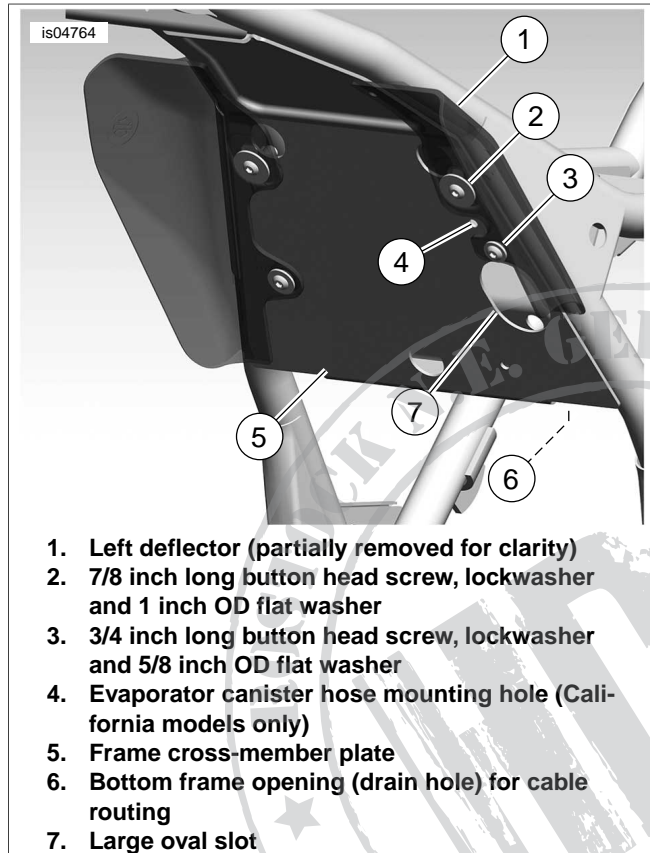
2008 Models: Fastener Locations - View of Frame Rearward of Rear Cylinder (Engine Removed for Clarity)
